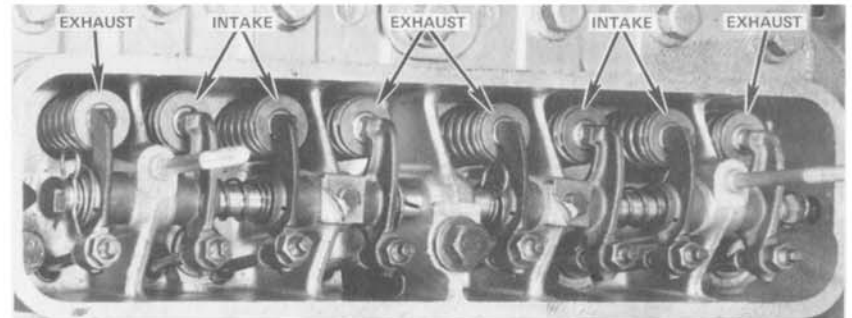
EXHAUST AND INTAKE VALVE LOCATION
